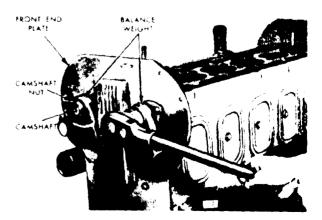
B-150. Loosening Nut on Camshaft or Balance Shaft
